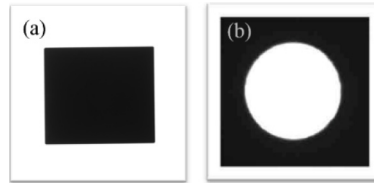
(a) Test image of rectangle standard gauge (b) Test image of inner diameter ring gauge
